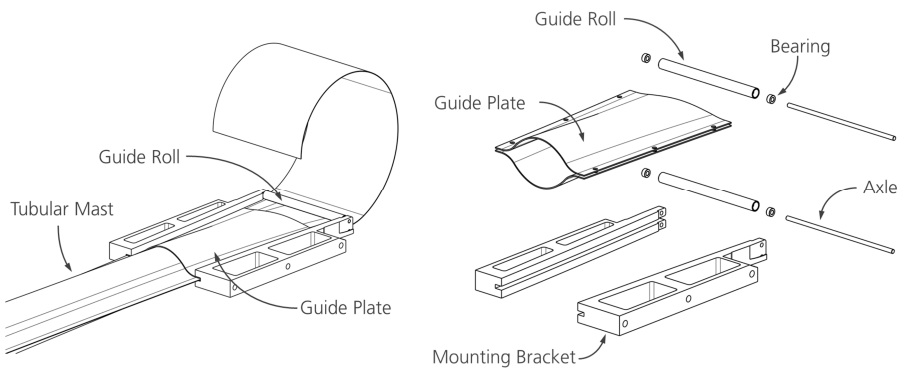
Boom support and guiding components with semi-coiled tubular boom (left) and in exploded state detailing its subcomponents (right).
